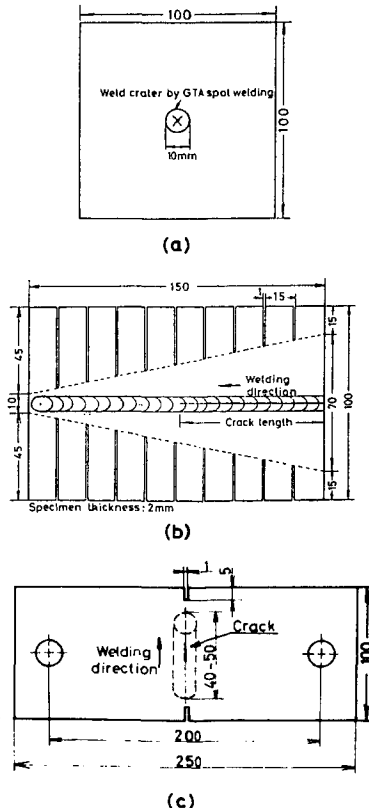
Shape and dimension of test specimen; (a) GTA spot weld crater cracking test, (b) Houldcroft type test, (c) Vatrah test
